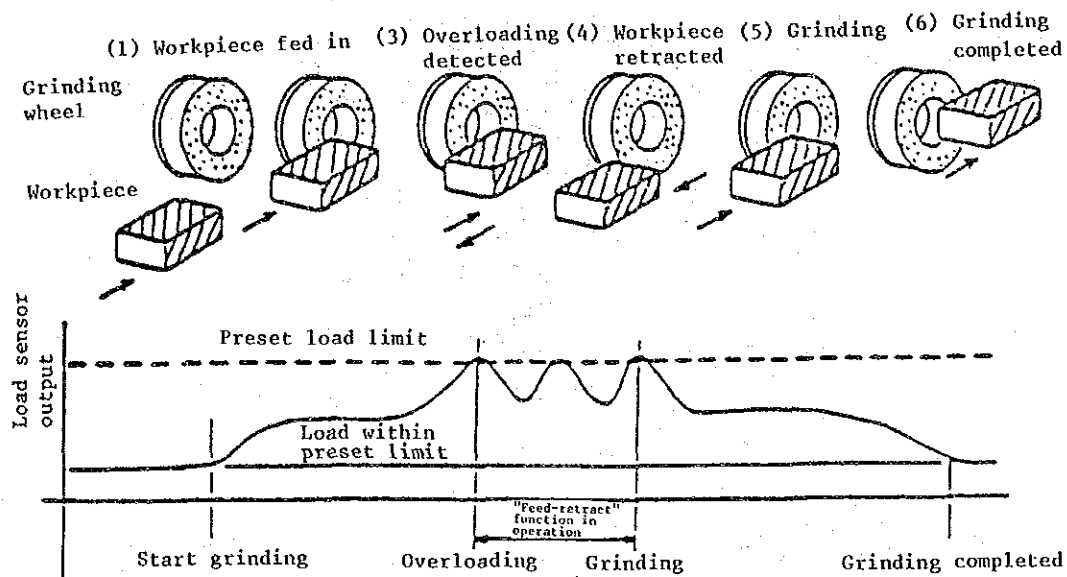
Functioning of "feed-retract" load-adjusting grinding machine
